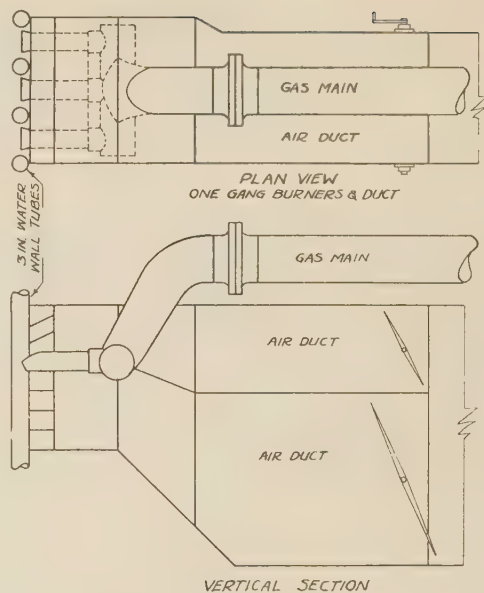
BURNER AND AIR-DUCT LAYOUT
